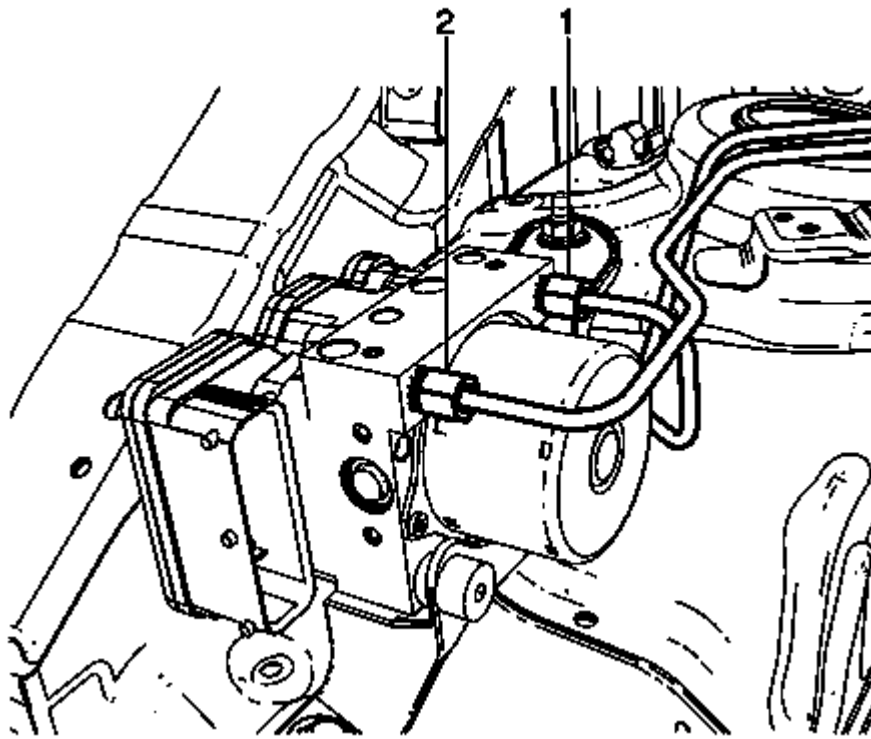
Master Cylinder Primary Brake Pipe Fitting
